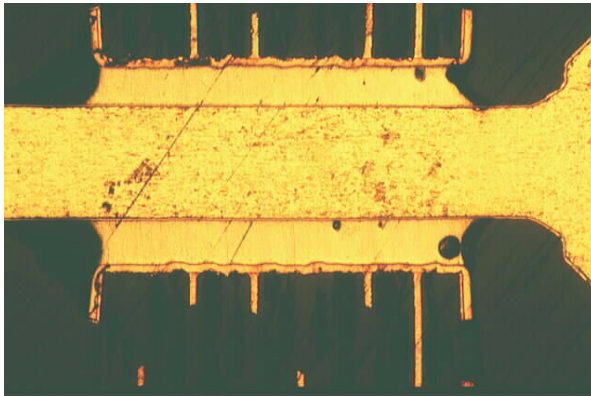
Microsection showing 100% solder fill after through-hole reflow.
